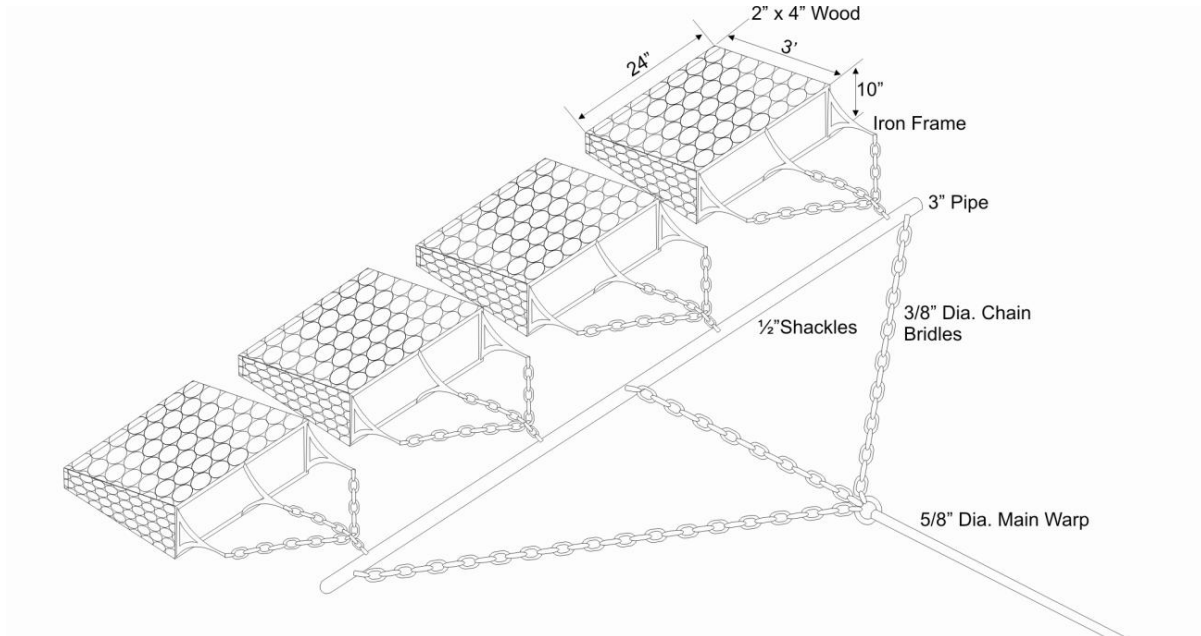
Typical Modified Labrador Scallop Rake used in the Strait of Belle Isle.
